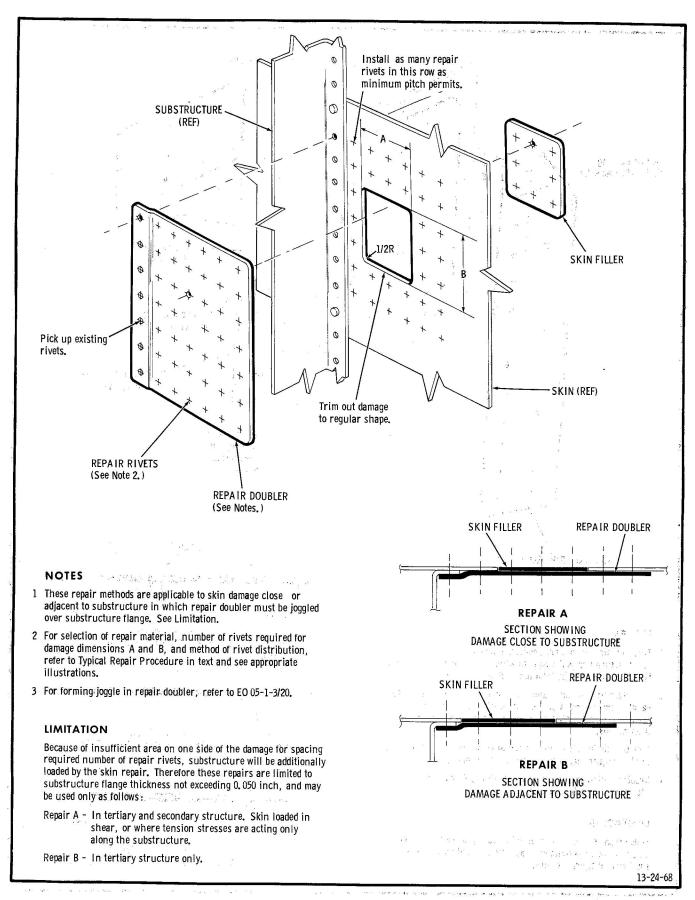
(Sheet 1 of 2) Skin Repair Methods - Repair Doubler Joggled over Substructure Flange
